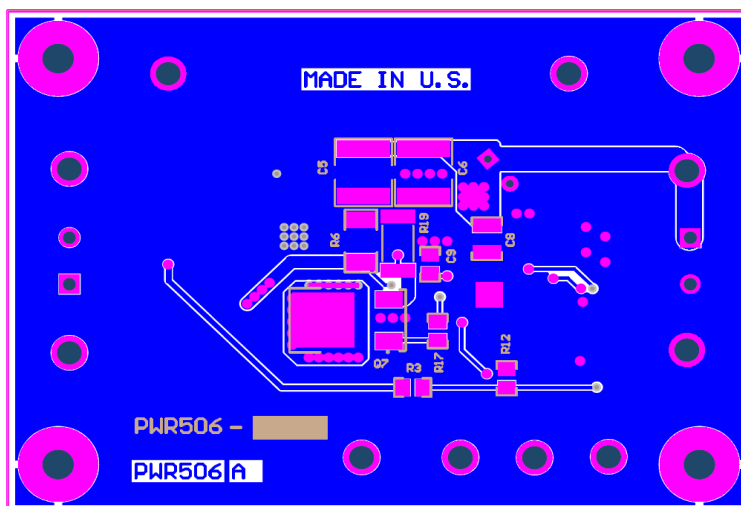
Bottom Layer and Bottom Overlay (Bottom View)
